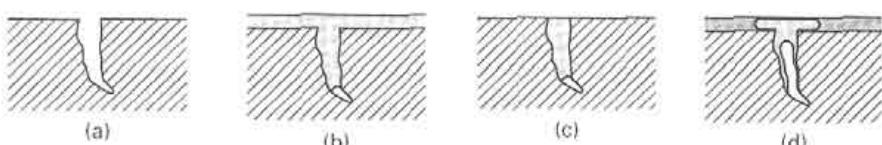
Liquid penetrant testing: (a) initial surface with open crack; (b) penetrant is applied and is pulled into the crack by capillary action; (c) excess penetrant is removed; (d) developer is applied, some penetrant is extracted, and the product is inspected.
